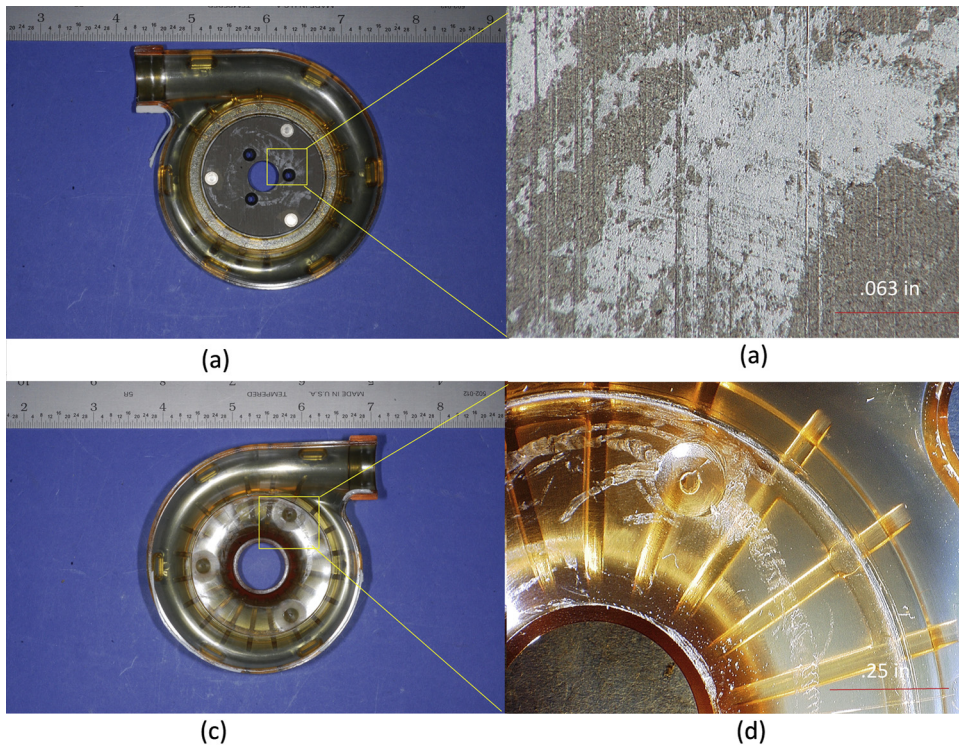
(a) Overall view of impeller casing reveals signs of wear on motor mount surface. (b) High magnification view of surface shows discoloration and wear marks. (c) Polymer side of impeller casing shows rotational wear marks. (d) High magnification view of polymer casing surface shows wear evidence and material removal.
